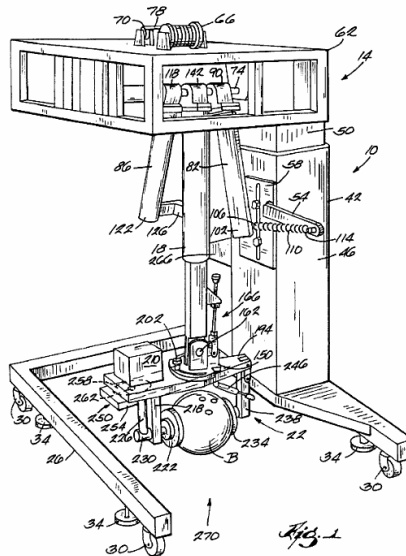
Three dimensional view of patent 6,379,257. Ball thrower.
